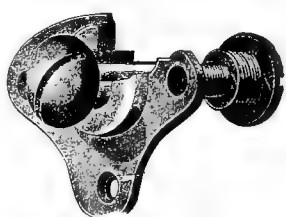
Seat Arm Pivot Bolt. Dayton Manufacturing Company.
